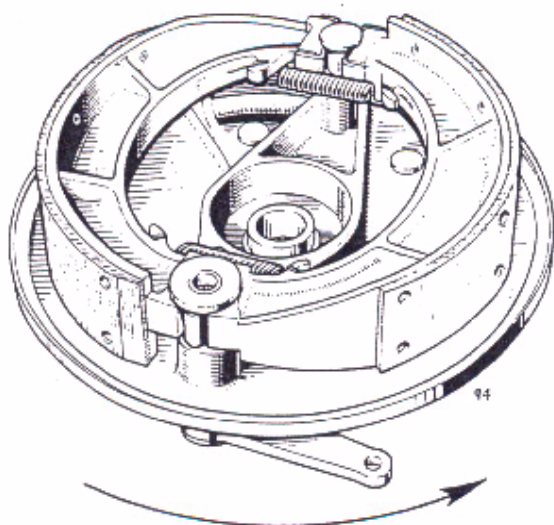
Correct assembly of brake shoes onto front anchor plate. Arrow indicates direction of rotation
